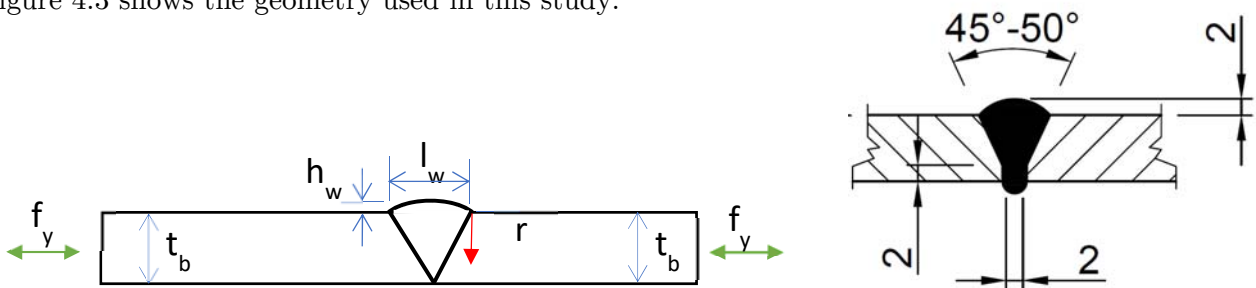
Full Penetration Single-sided Butt Weld geometry.
